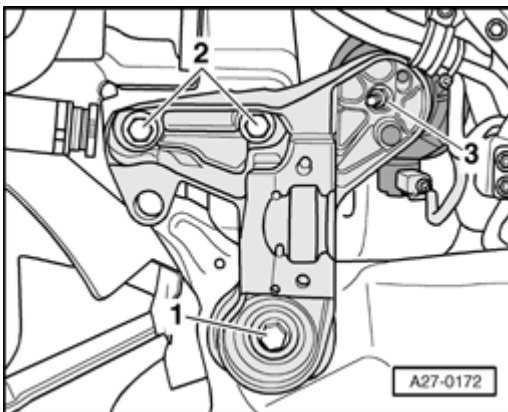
Identifying Nuts, Bolts, And Right Side Engine Mount Carrier
